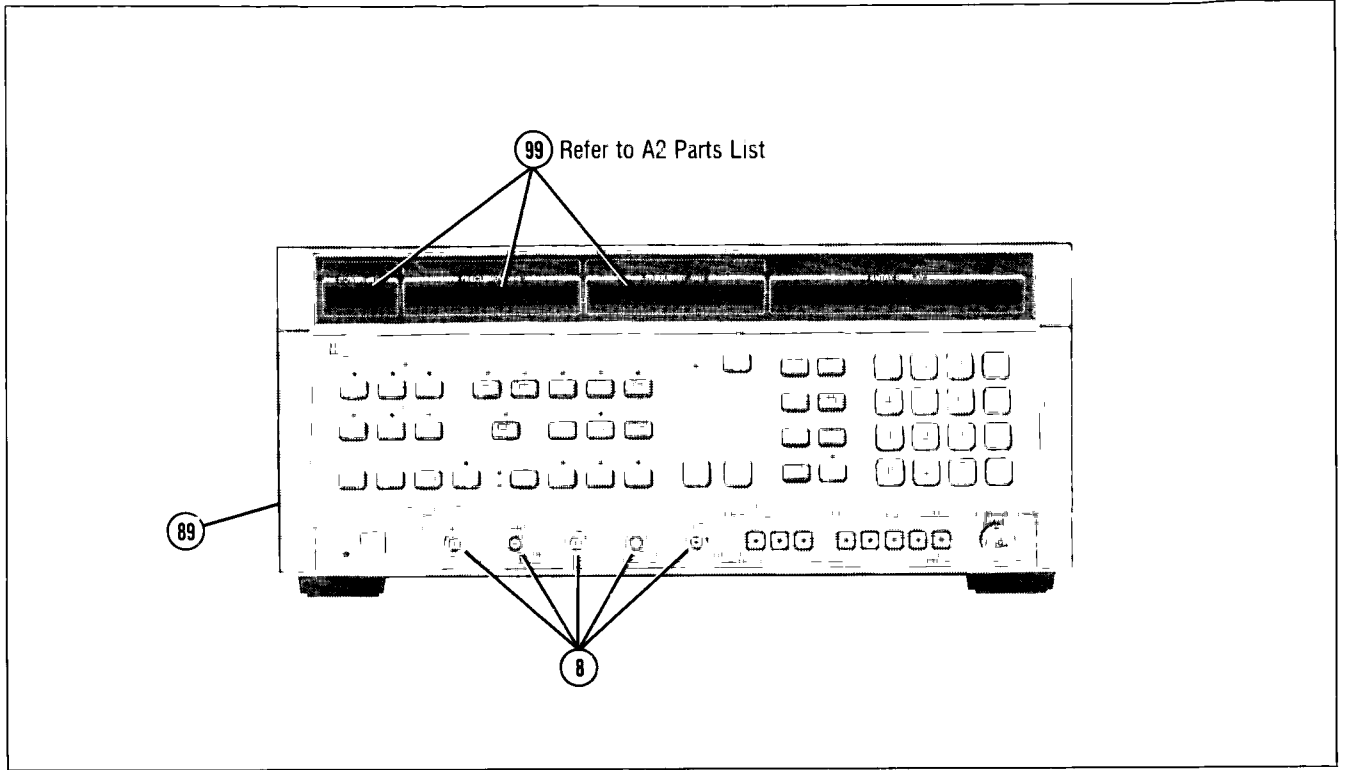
Miscellaneous Mechanical & Chassis Parts (1 of 6)
